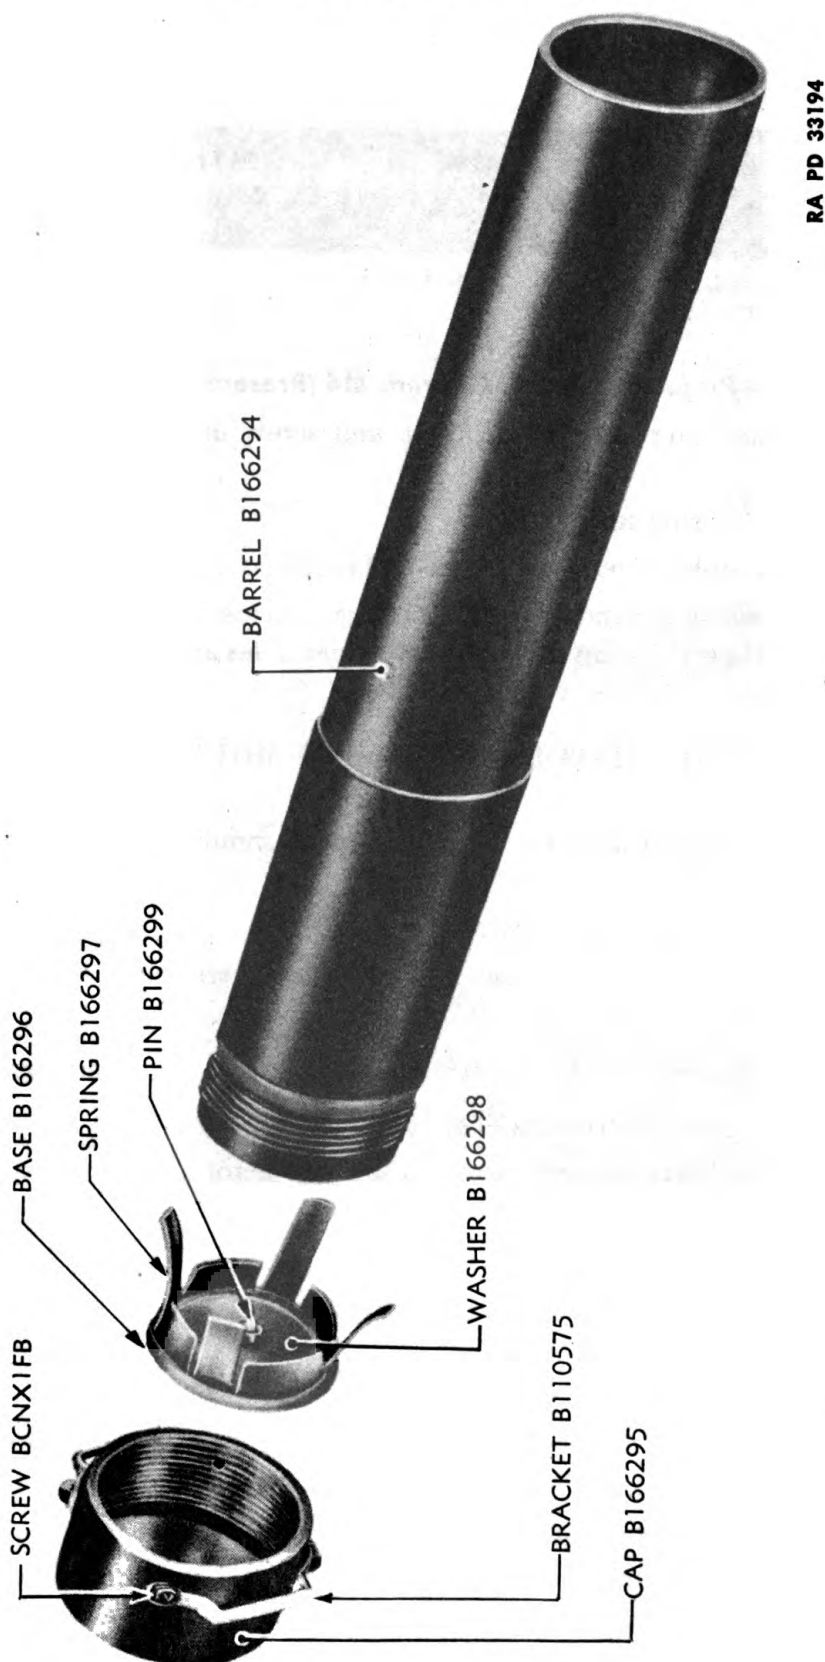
Projector, Signal, Ground, M4 (Early Manufacture)
